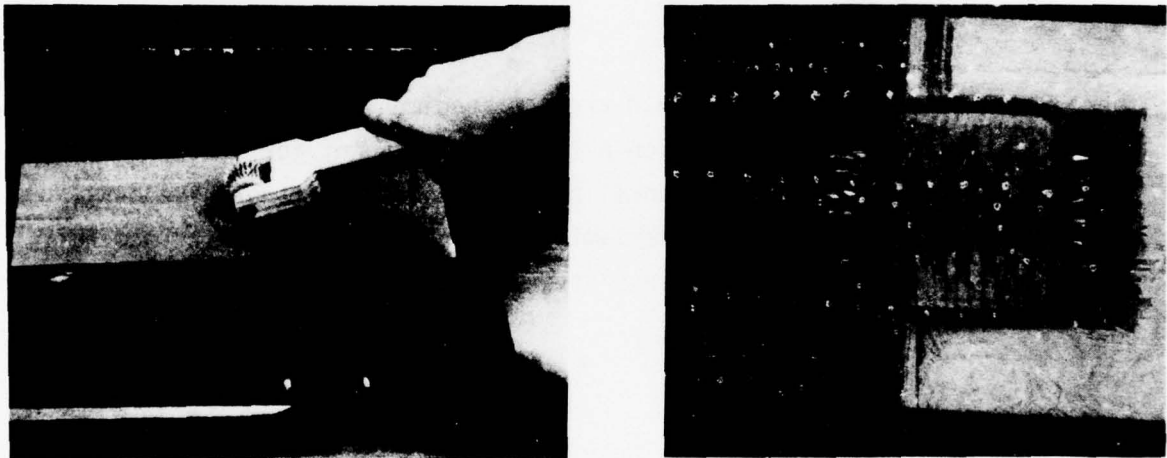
Hand Tool used to Perforate Mylar Inserts
